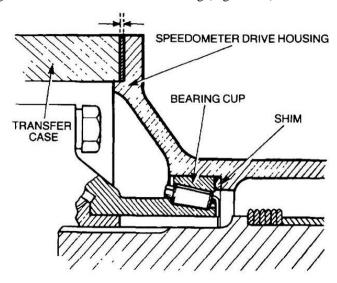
Differential Assembly Pre-load Adjustment - Sectional View
